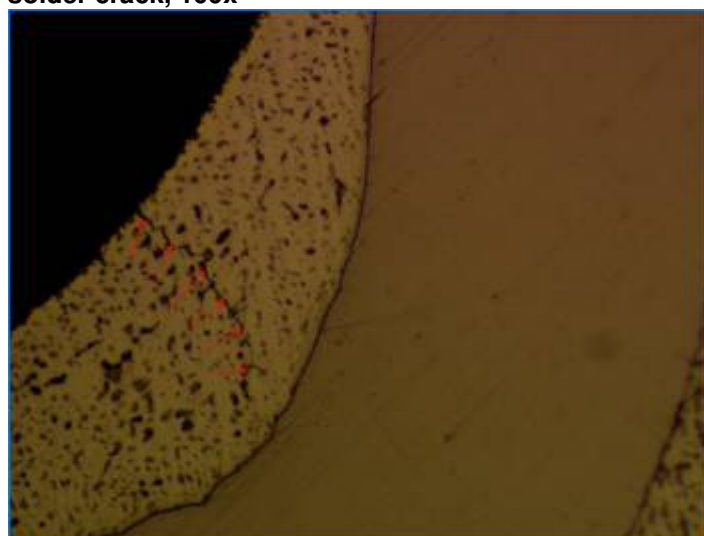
cross section, SN61, U62, left lead, solder crack, 400x
